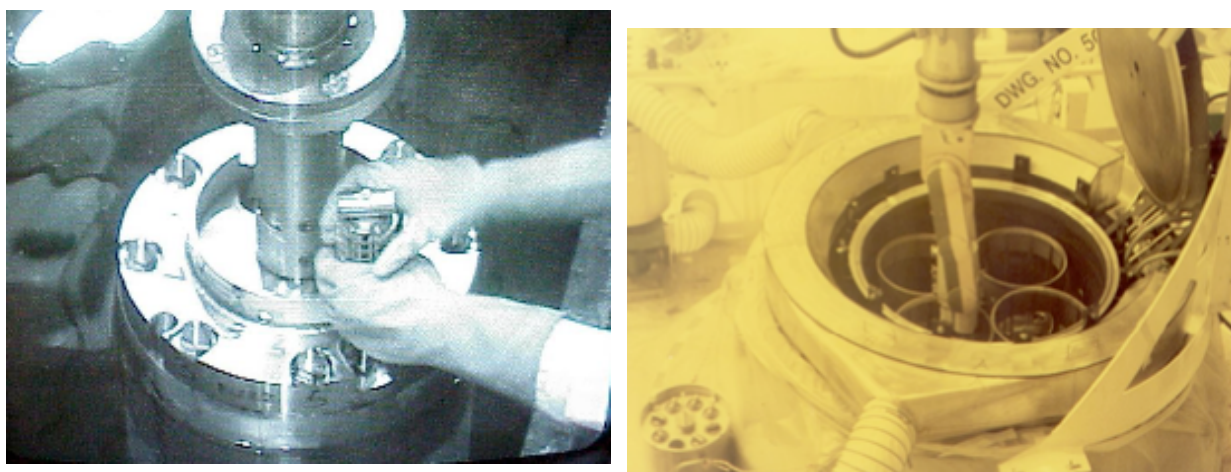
Installation and removal of sintered-metal filters (Both courtesy of INL)
